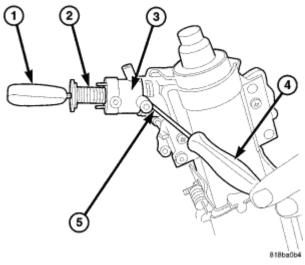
Removing Key Cylinder Courtesy of CHRYSLER LLC
